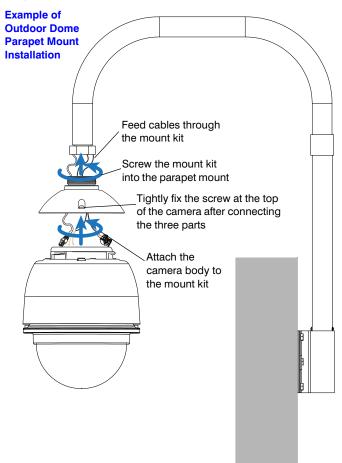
HDPRM2 Parapet/Flat Roof Mount Installation
